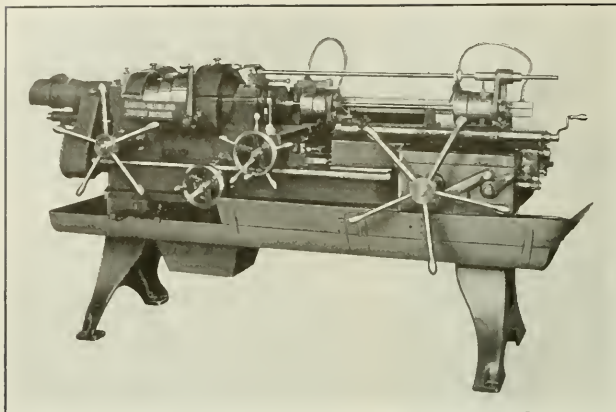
Staybolt Machine built by the Millholland Machine Co.
